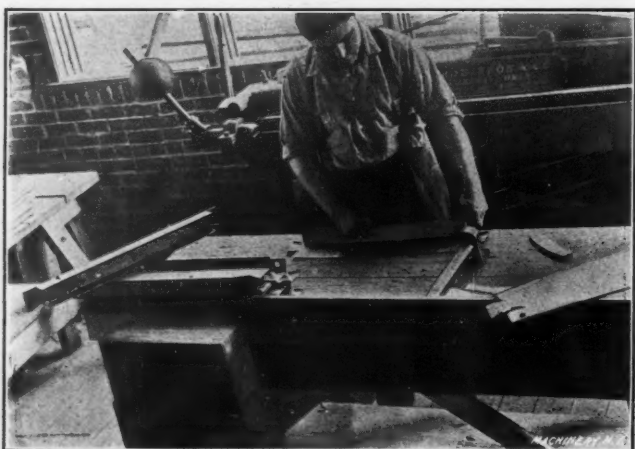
Making the Bottom Water Tanks out of Sheet Brass
